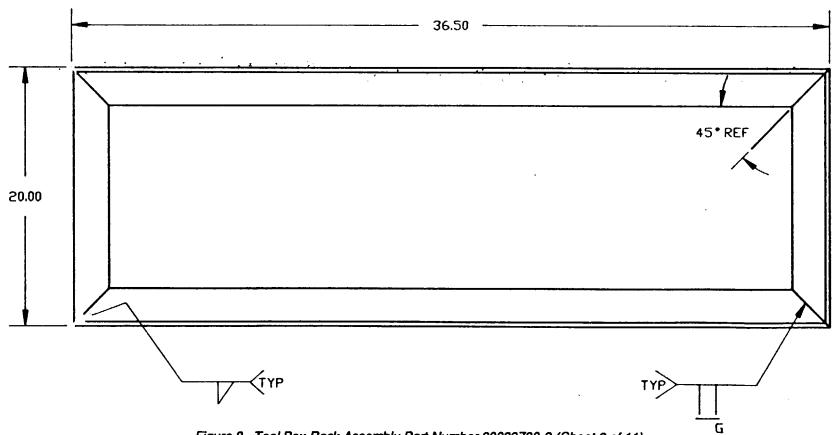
Tool Box Rack Assembly Part Number 20089720-2 (Sheet 2 of 11)
